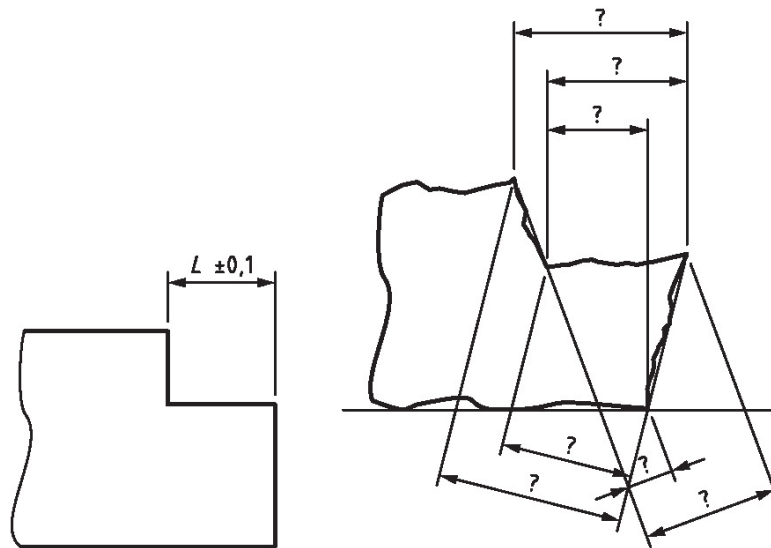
Example of a linear step dimension showing ambiguity due to the geometrical errors of two surfaces [88]
